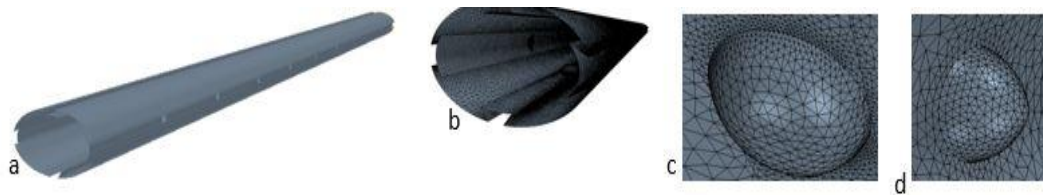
(a) Geometrical shape of the enhanced elliptical tube. (b) Meshing of the enhanced elliptical tube. (c) Upper and bottom dimples (d) Side dimples.
